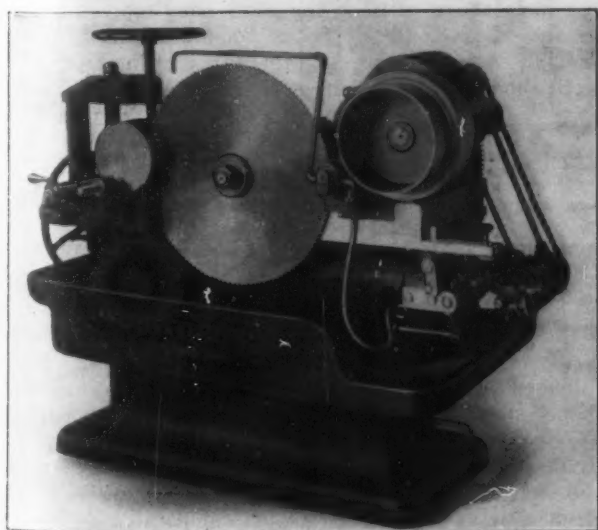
An 8-In. Metal Saw Cutting-off Machine Made by the Nutter & Barnes Company, Boston, Mass.
